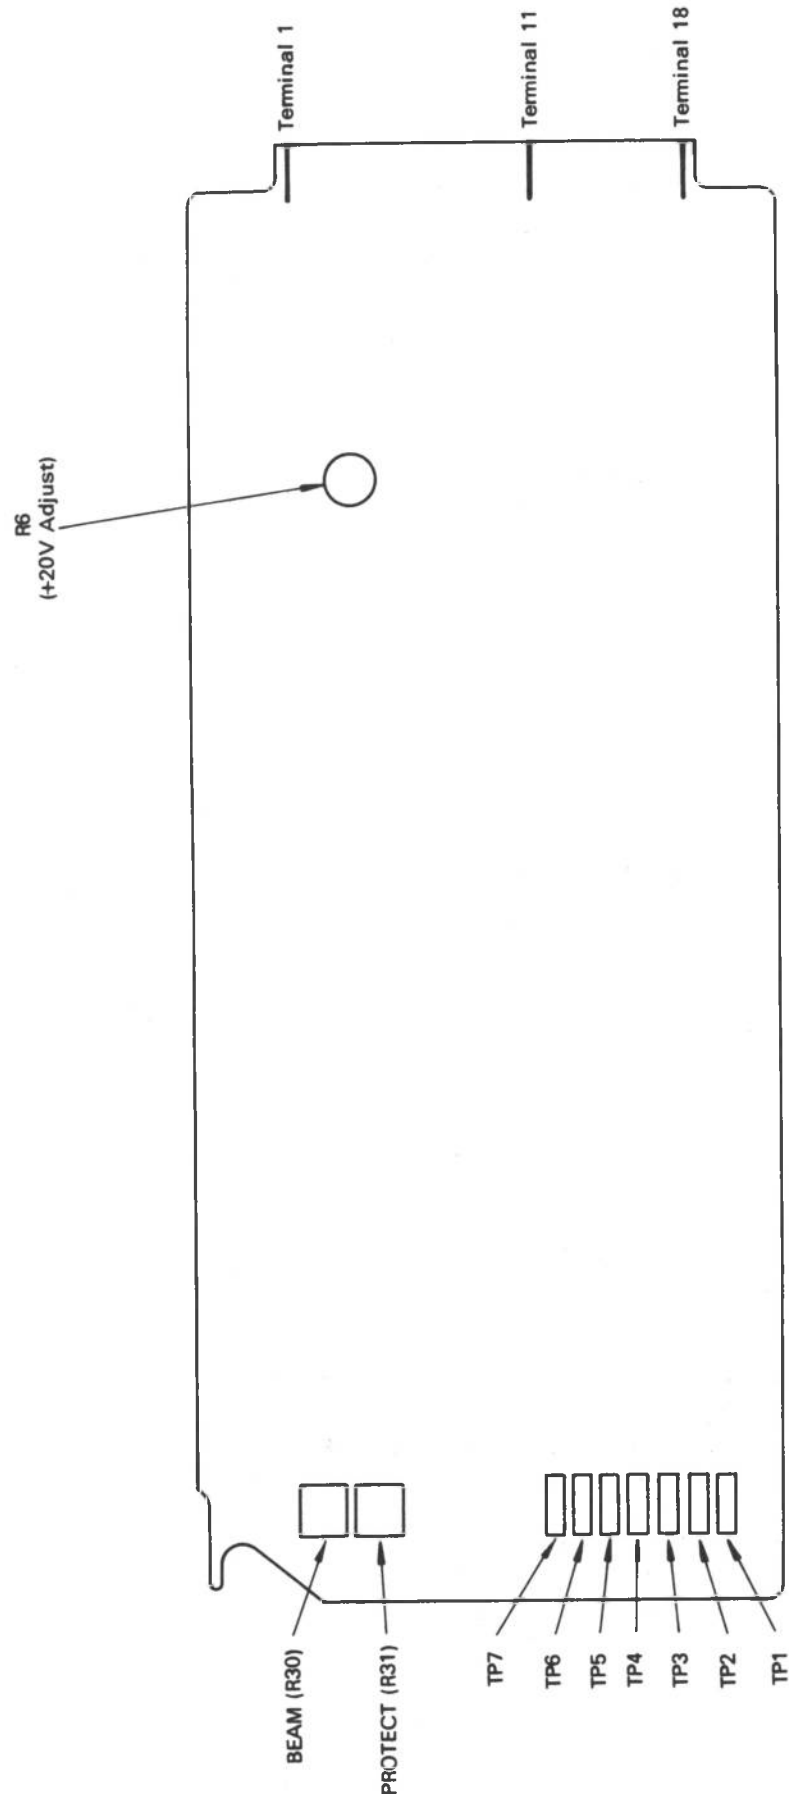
Power Supply Board Test Points and Adjustable Controls
